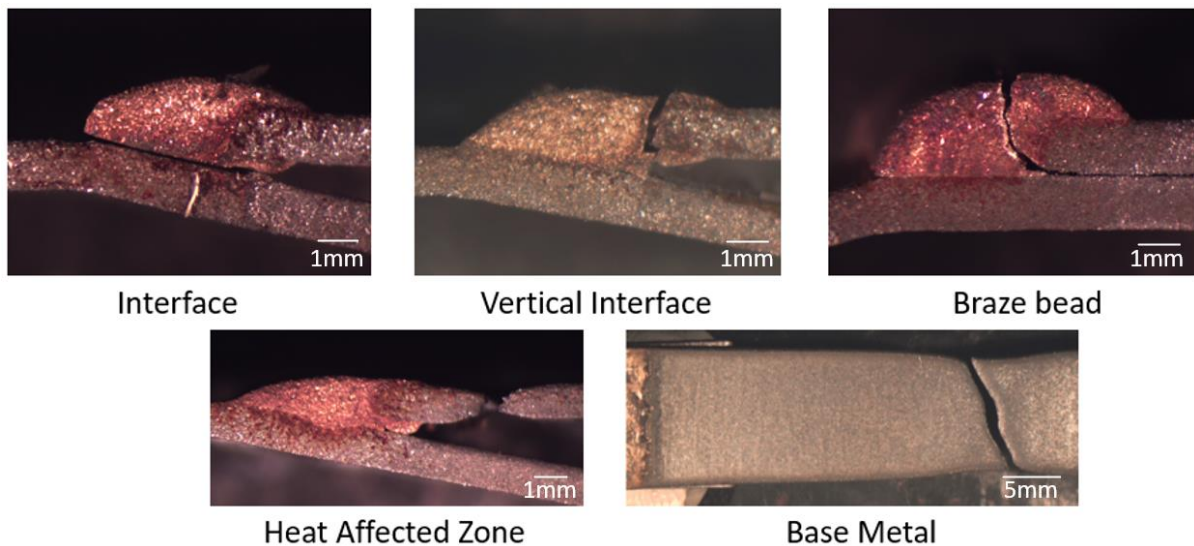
Five types of fracture modes observed during lap-shear tensile testing of a GMA brazed lap joint.
